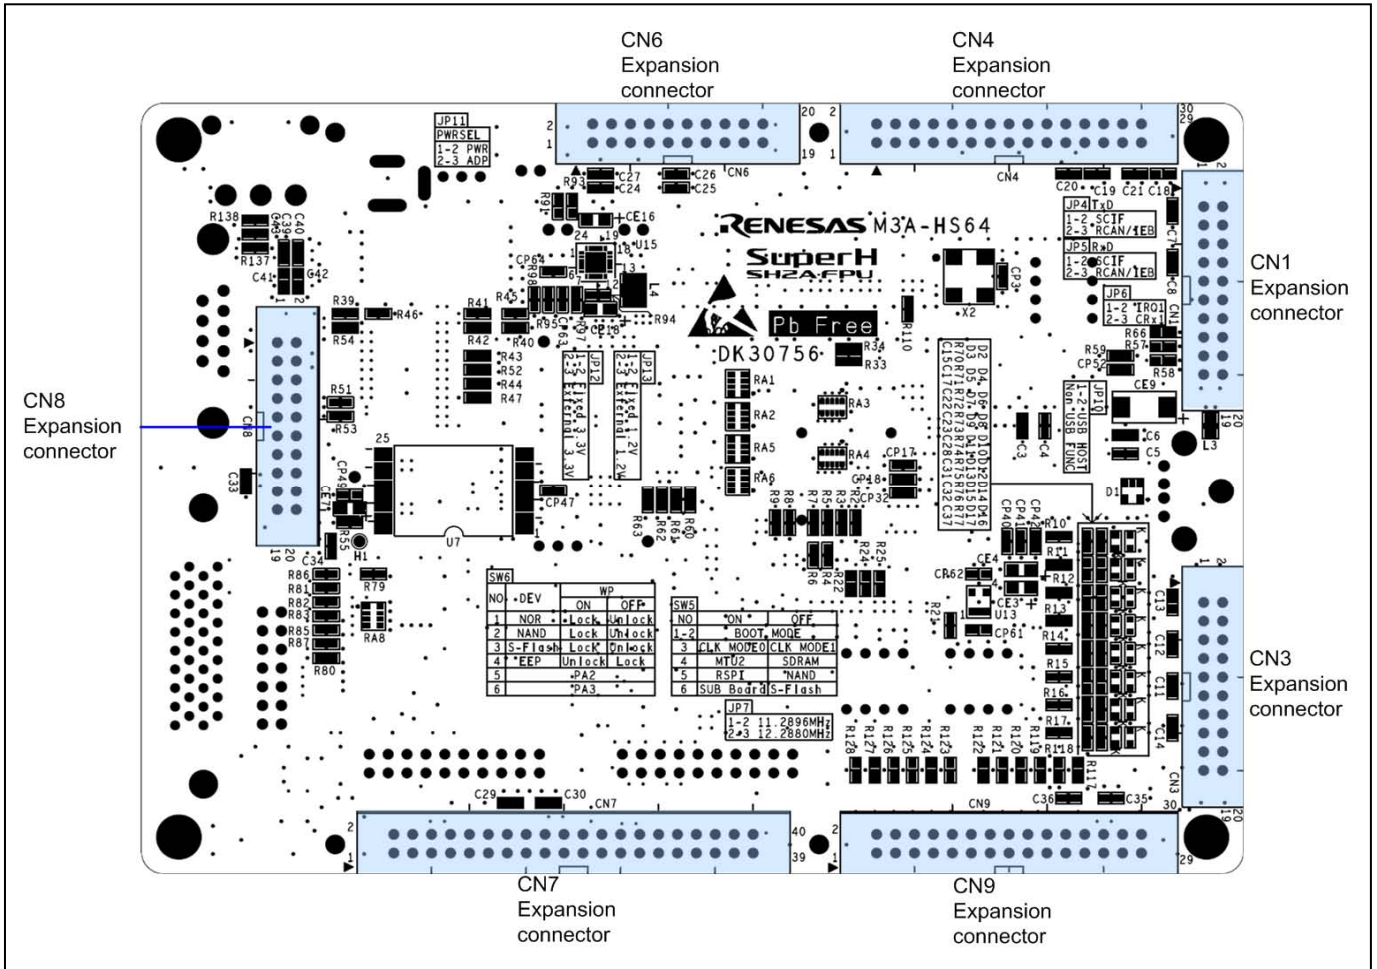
M3A-HS64 Connectors (Top View of the Solder Side)
